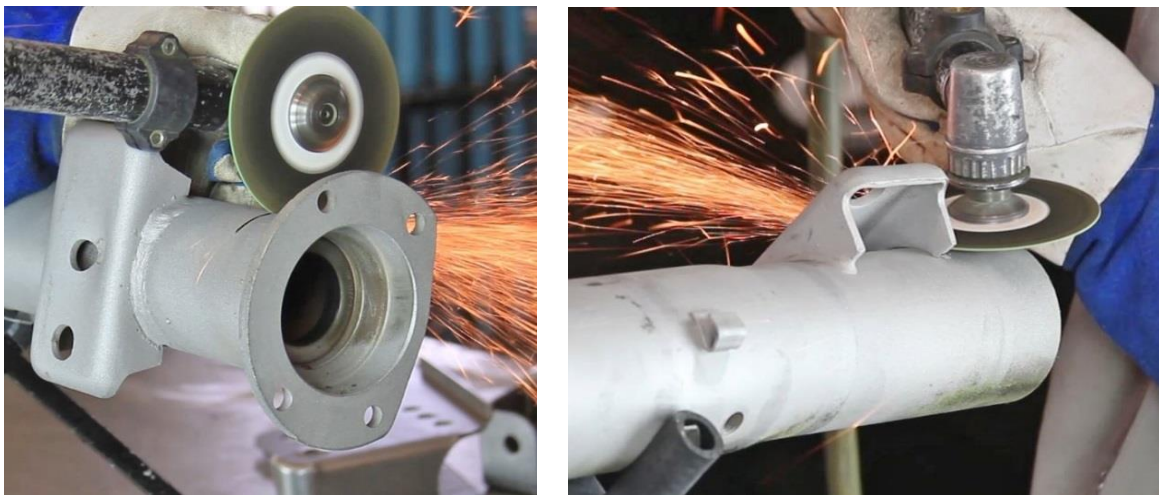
Remove Housing Ends & Leaf/Coil Spring Brackets
